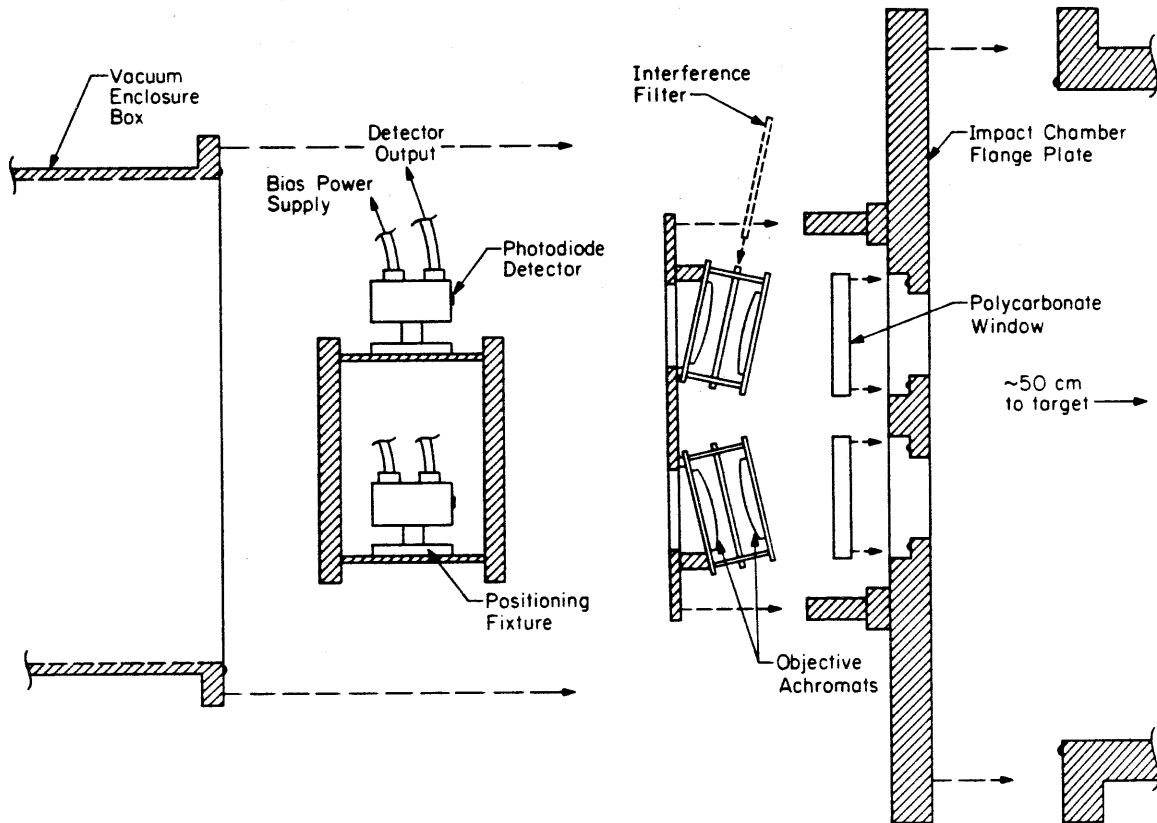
Exploded view (side cross section) of pyrometer components. Optical elements are fixed to flange plate, while detector array is adjustable in position. Vacuum enclosure box surrounds entire assembly to provide backup vacuum integrity in the event of window failure. Lens aperture is 52 mm and effective system focal length is 140 mm.
